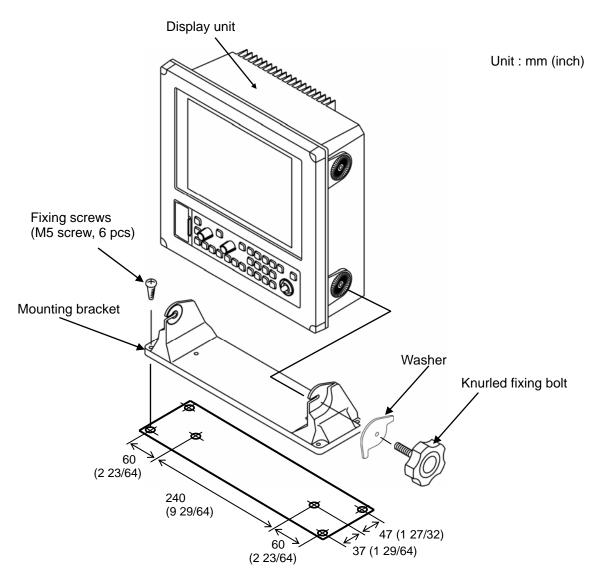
Fitting detail of GTD-110 in table mounting mode
